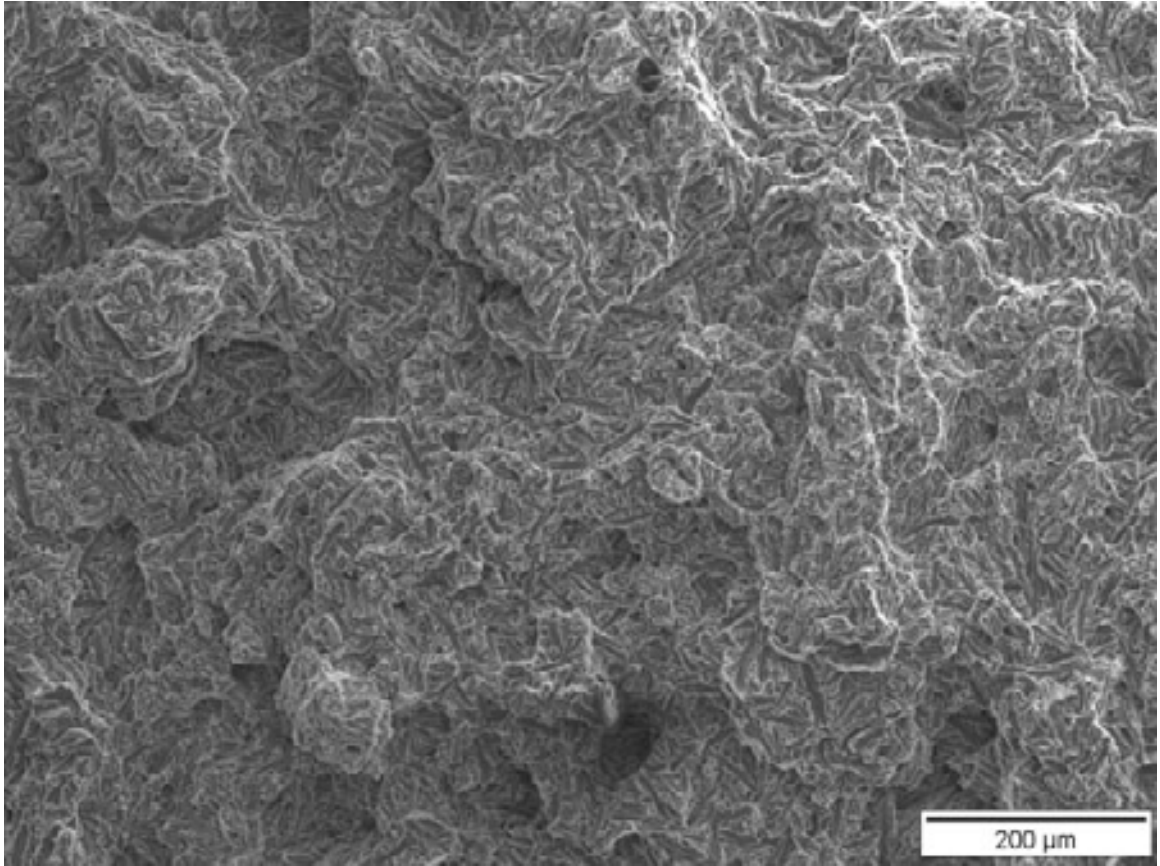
Fracture surface of compacted Ti-6Al-4V-1B modified alloy showing a jagged fracture surface, suggesting brittle fracture.
